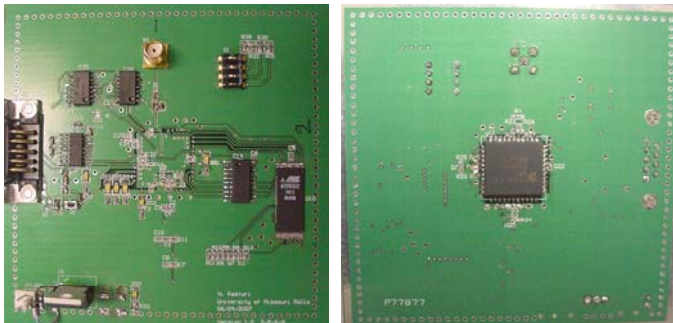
Completed printed circuit board. Top view (left); bottom view (right).
